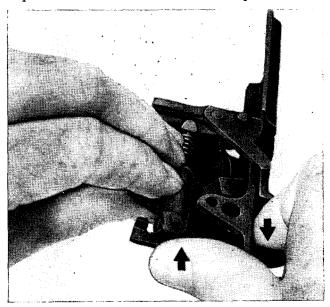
Replacement of the trigger assembly, hammer spring housing, hammer spring, and hammer spring plunger.
